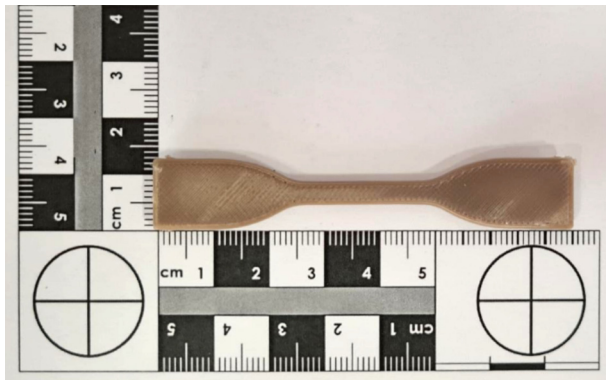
Dog-bone specimen geometry, specimen type 5-A.
